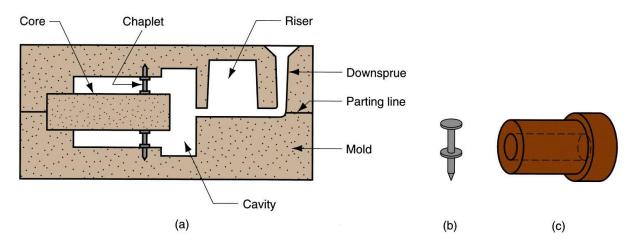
(a) Core held in place in the mold cavity by chaplets, (b) possible chaplet design, (c) casting with internal cavity.
